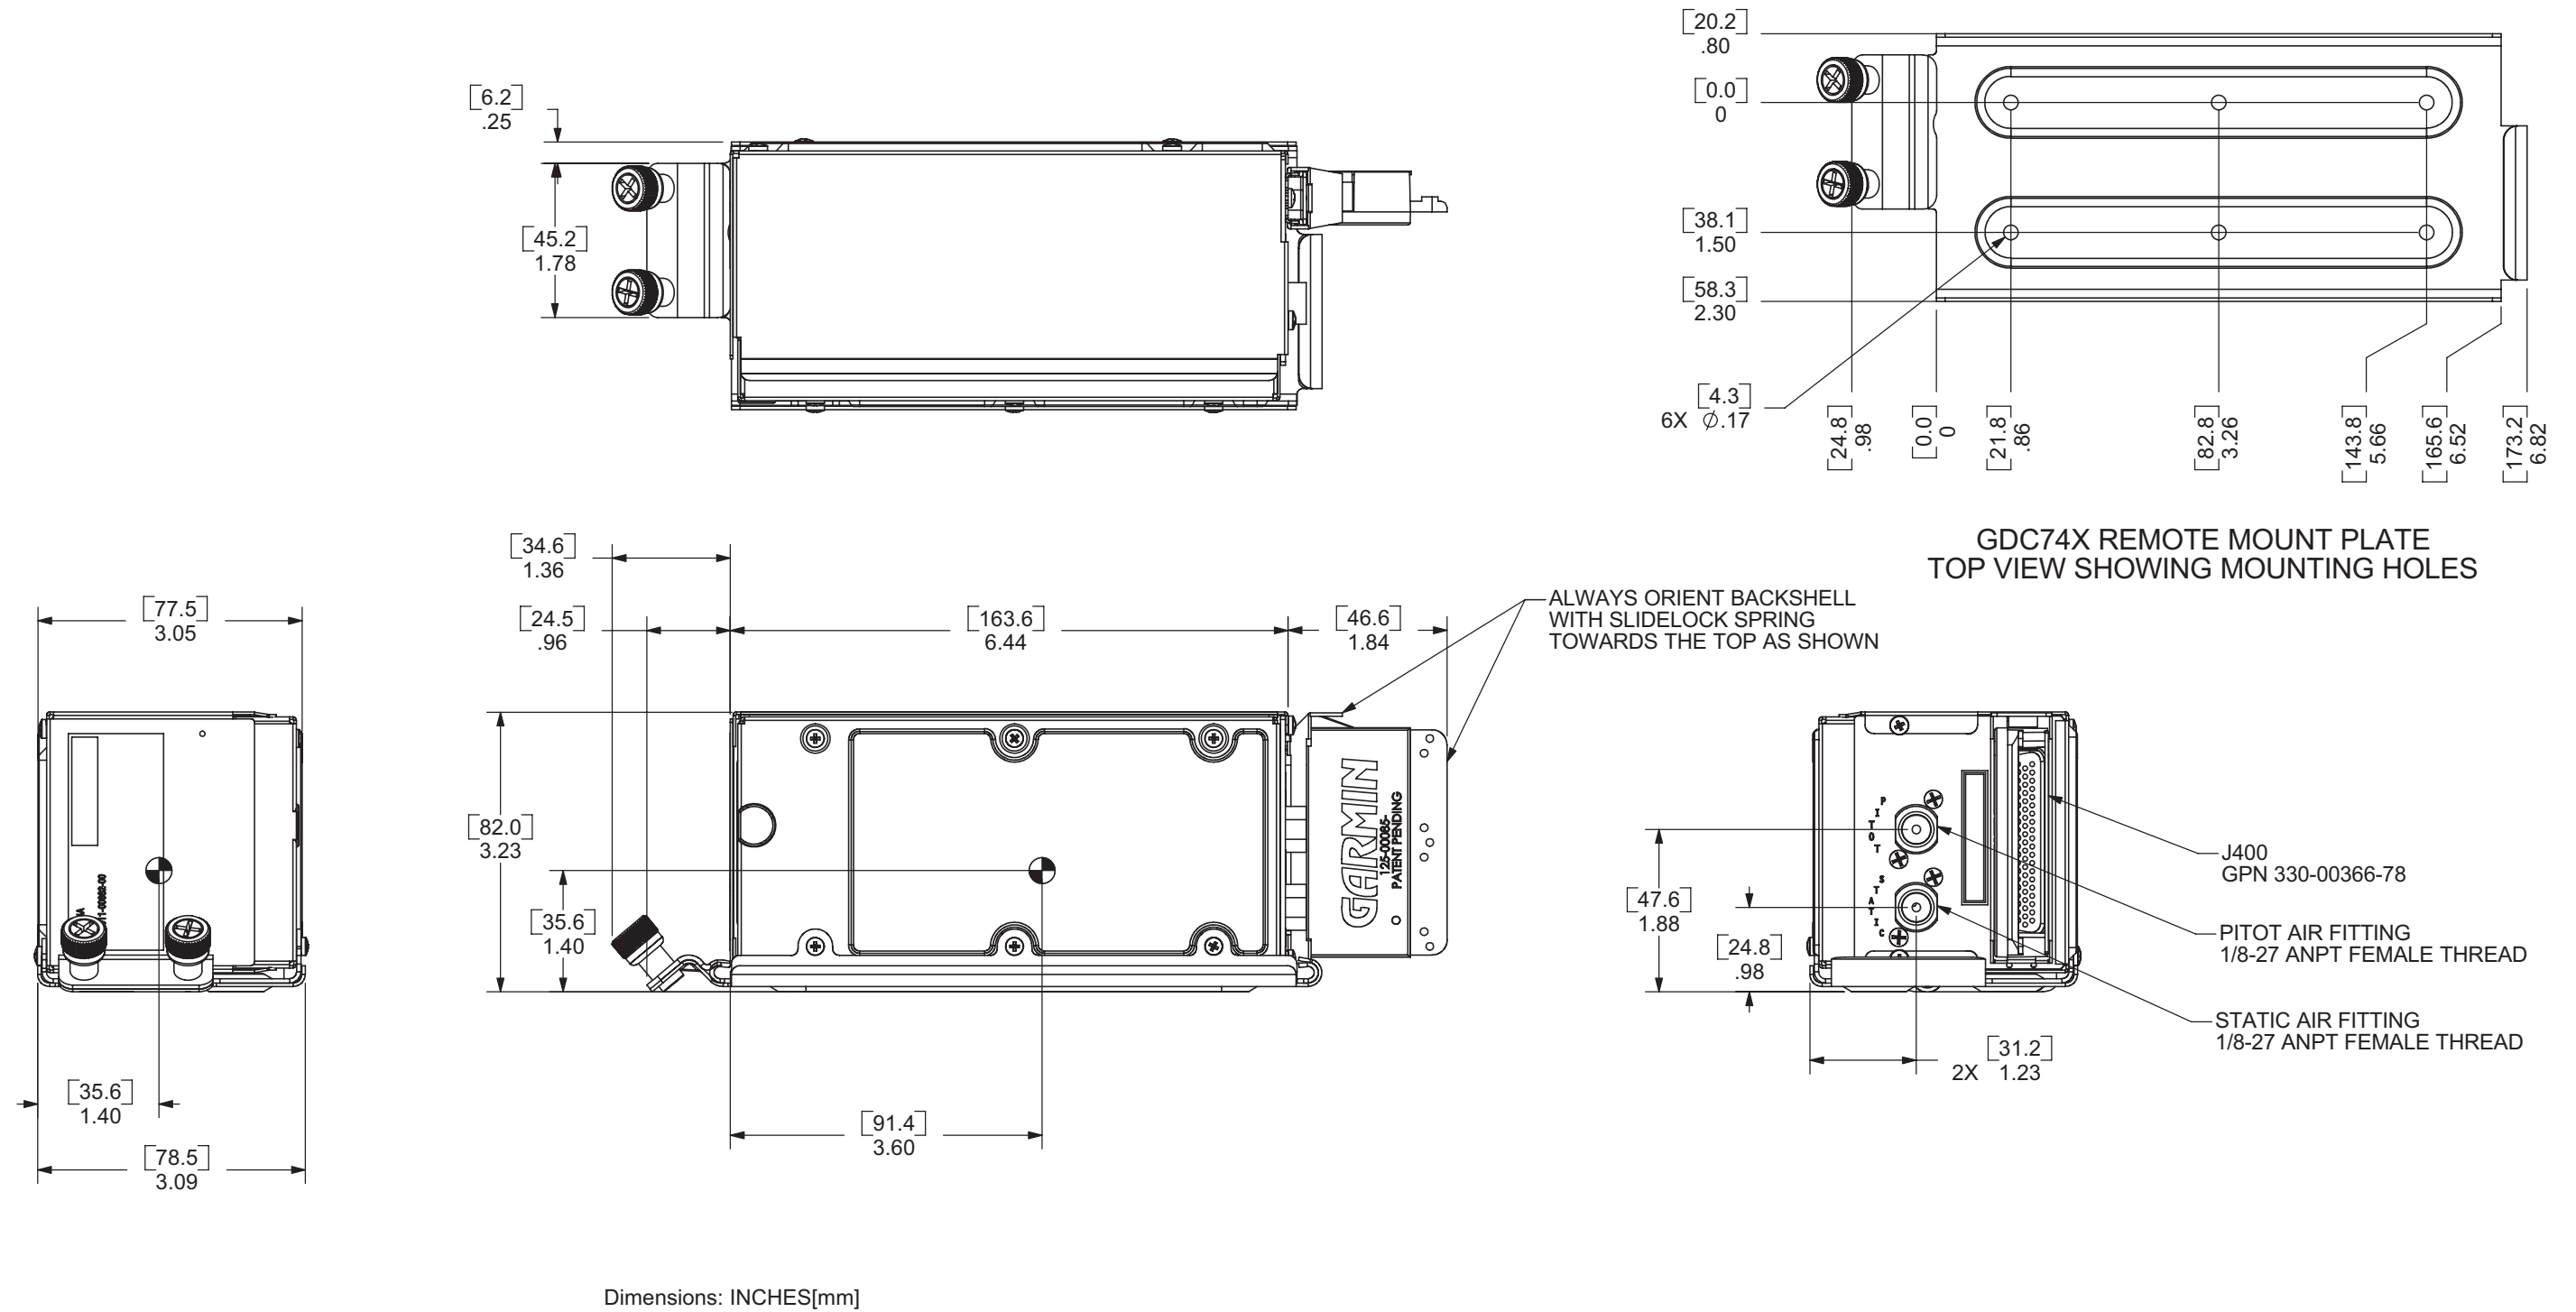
GDC 74A Outline Drawing for Remote Mounting Option I (Sheet 1 of 2)
